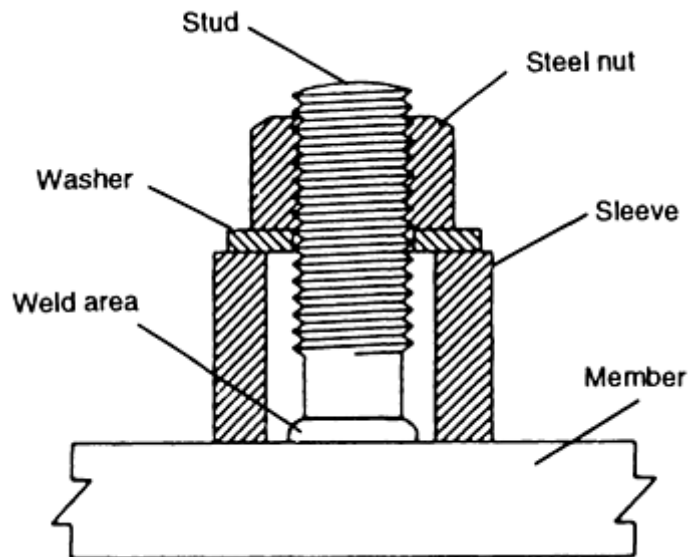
TYPICAL TORQUE TESTING ARRANGEMENT. STUDS THAT MUST UNDERGO APPLICATION QUALIFICATION OR PREPRODUCTION TESTING SHOULD BE TORQUED TO DESTRUCTION WITHOUT FAILURE IN THE WELD. PROOF TORQUE TESTING DURING INSPECTION OF THREADED STUDS SHOULD BE APPLIED AT 60 TO 66% OF THE YIELD TORQUE LOAD FOR THE STUD SIZE TESTING. REFER TO TABLES 7, 8, AND 9. SOURCE: REF 2
